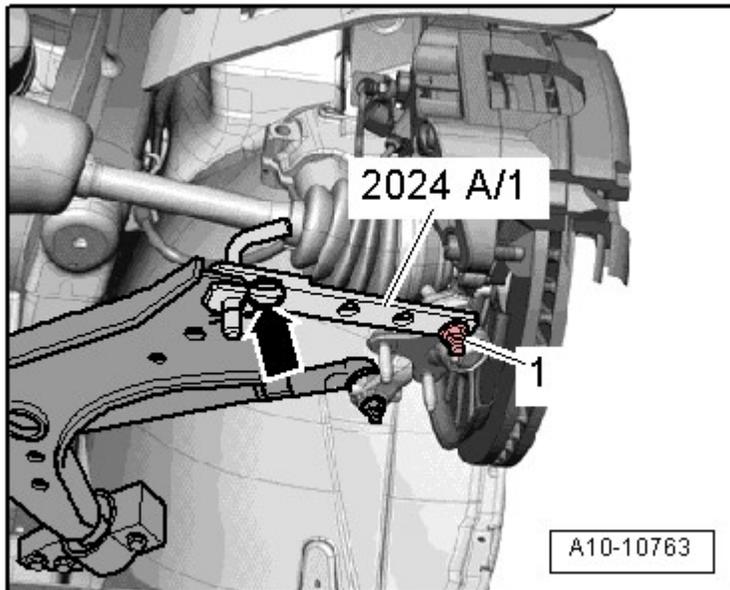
Tilting Right Suspension Strut Outward And Supporting It With Extension 2024 A /1
